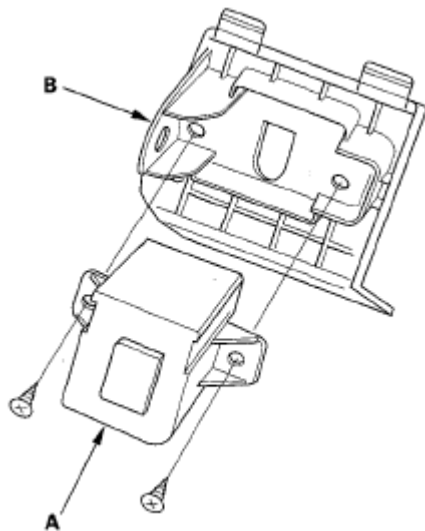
Identifying Auxiliary Jack Assembly And Auxiliary Jack Trim
